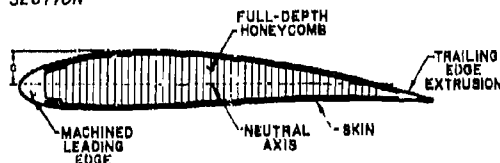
Typical Honeycomb-Core Sandwich Flap Element.
